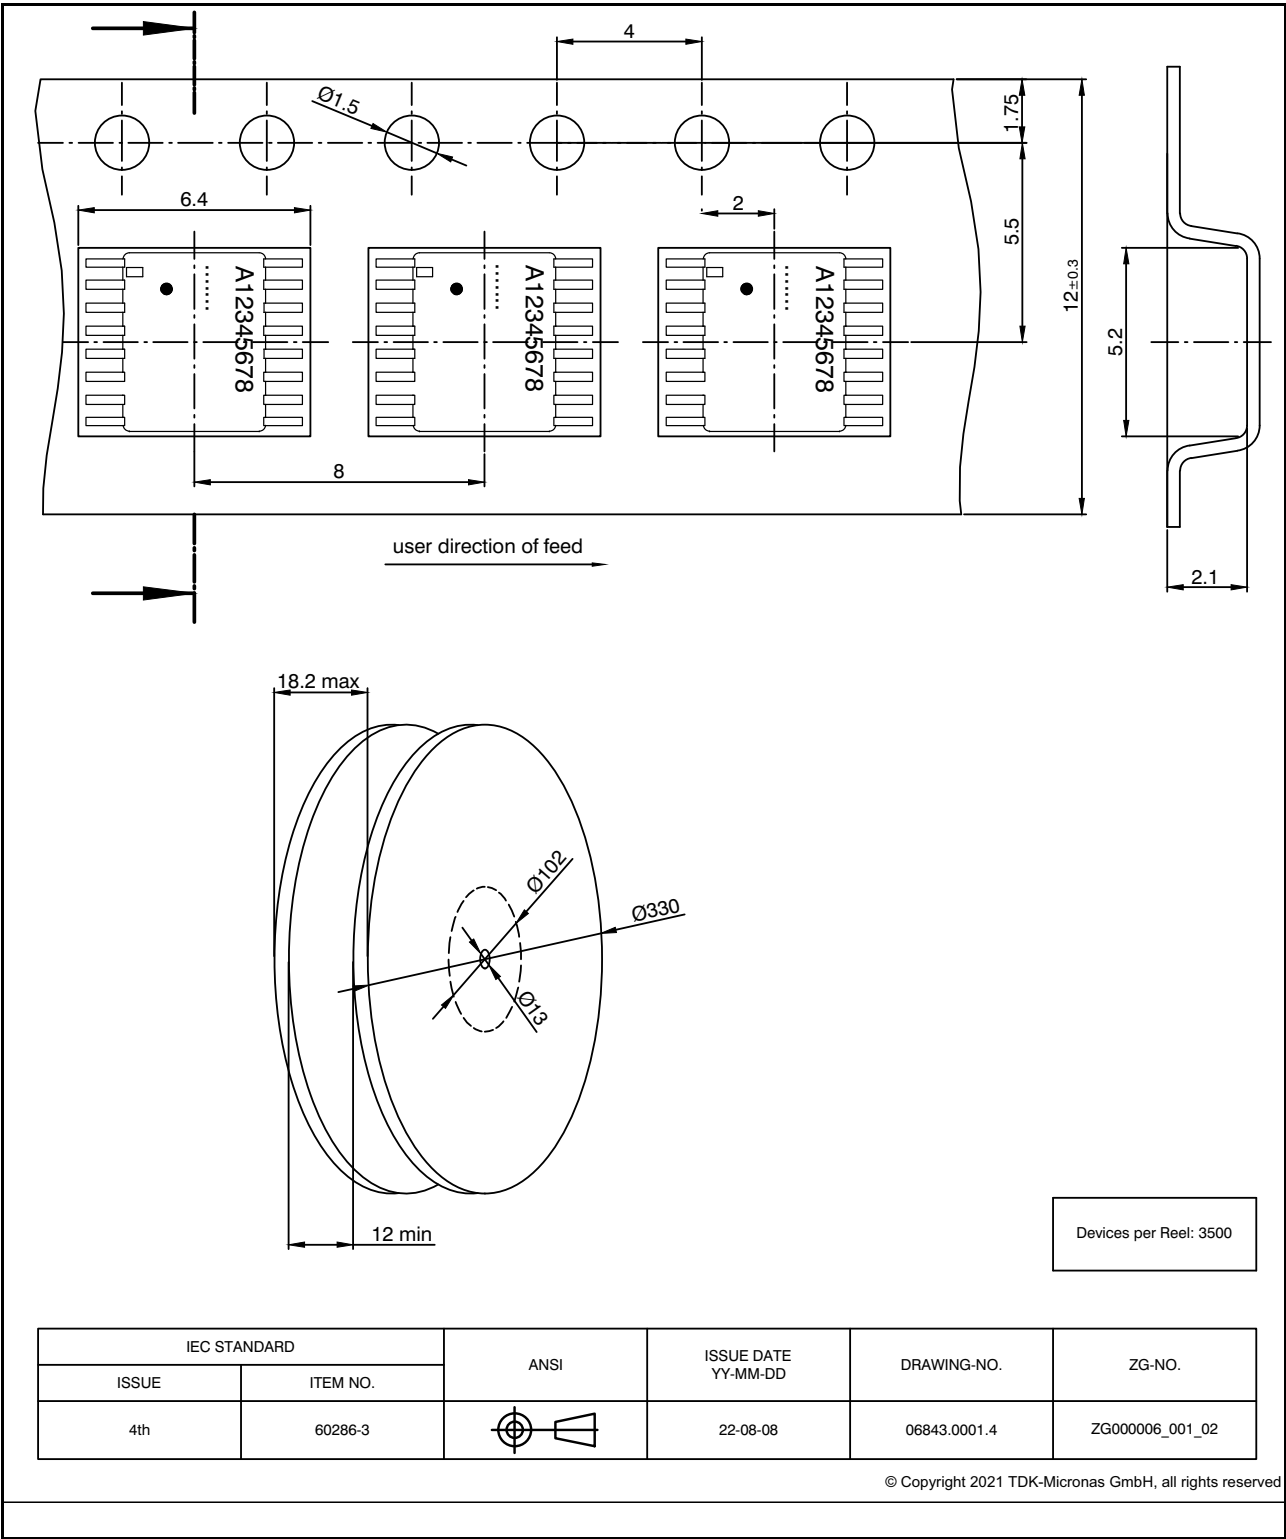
SSOP16: Tape and Reel Finishing (all dimensions in mm)
